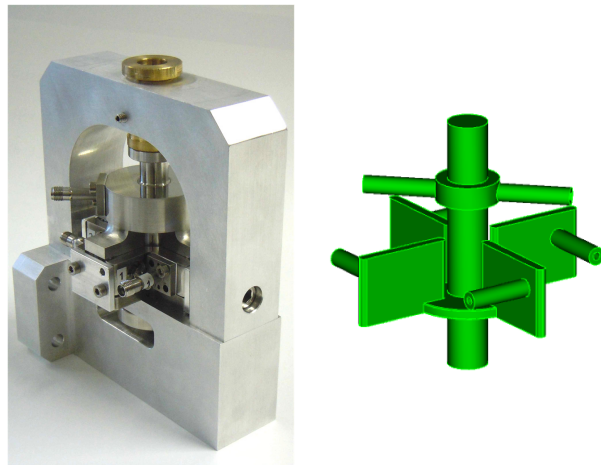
The prototype pick-up assembled in a clamp specifically designed for the bench measurements (left) and the vacuum geometry (right).
